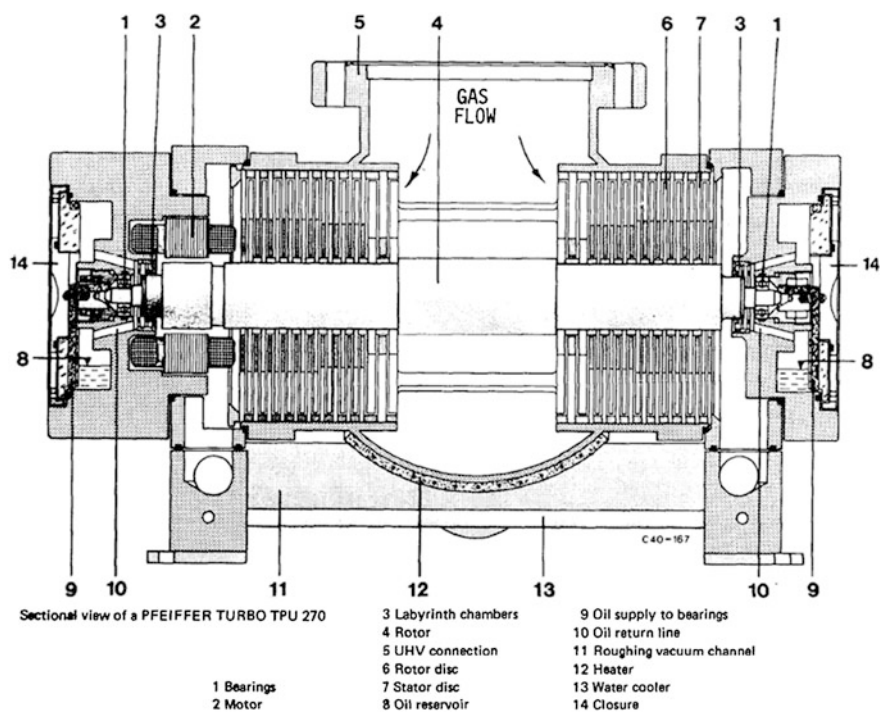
Cutaway view of a turbomolecular pump. The rotor turns at a speed of 60,000 rpm (1000 Hz). Courtesy of Balzers Corporation, Hudson, NH. 1 Bearings. 2 Motor. 3 Labyrinth chambers. 4 Rotor. 5 UHV connection. 6 Rotor disc. 7 Stator disc. 8 Oil reservoir. 9 Oil supply to bearings. 10 Oil return line. 11 Roughing vacuum channel. 12 Heater. 13 Water cooler. 14 Closure
